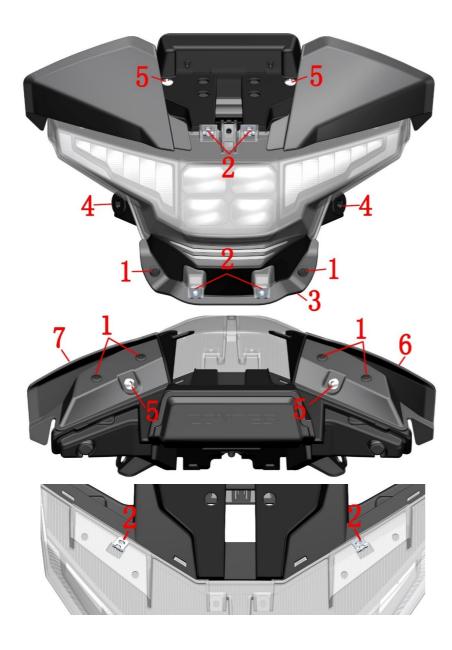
FRONT FORK		Headlight component 2	СНК	0
